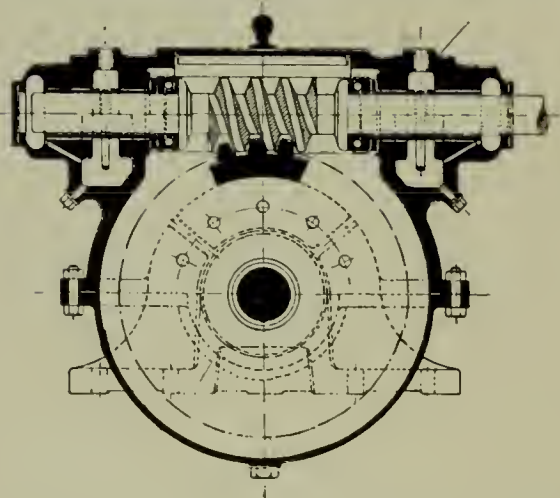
AN EXAMPLE OF WORM GEARING USED IN CONNECTION WITH MOTORS FOR OPERATING CRANES
